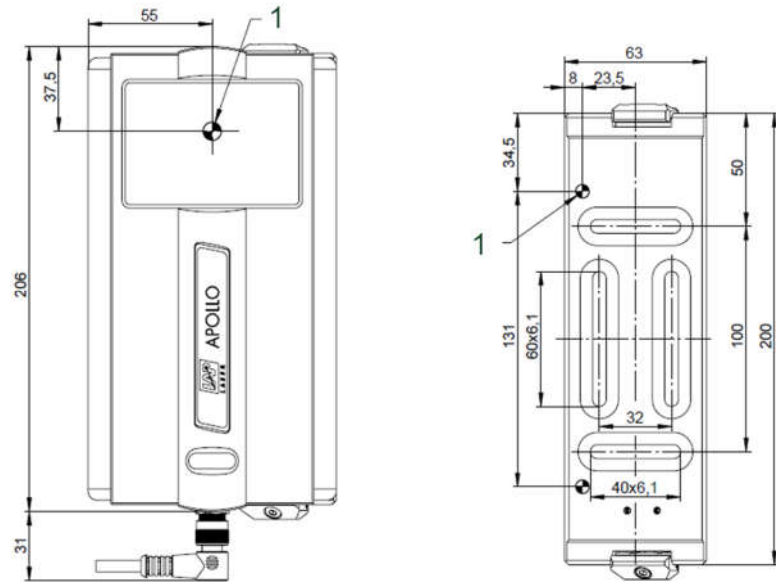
Laser device and swivel mount – view from front (dimensions in mm)
